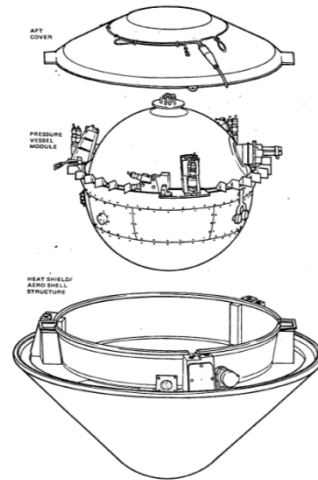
, 1-1 Large Probe Spacecraft (Exploded View)
